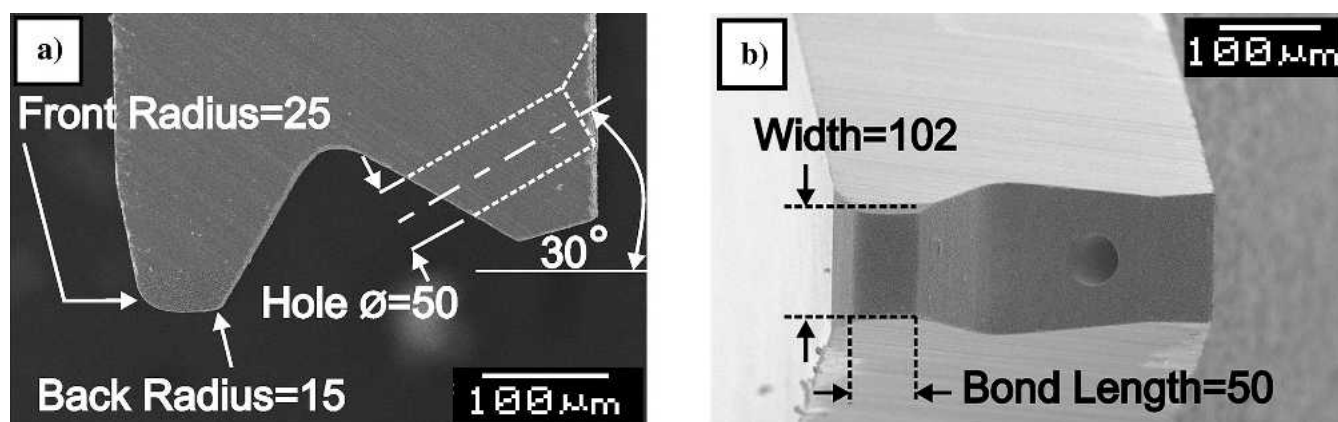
Wedge geometry used in the study (all dimensions in micrometers): (a) side profile view of the tool and (b) underside of the tool.
